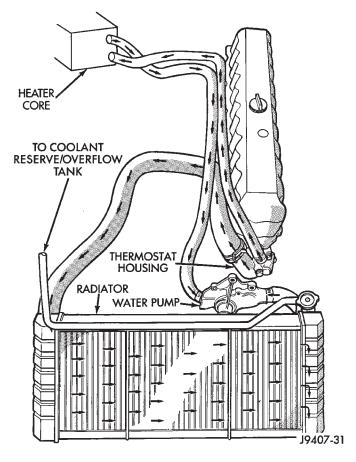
Engine Cooling System—4.0L Engine— Typical
